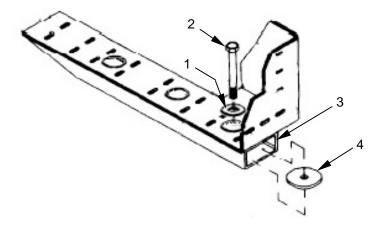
Assemble Rear Mounting Bracket (Upper)
